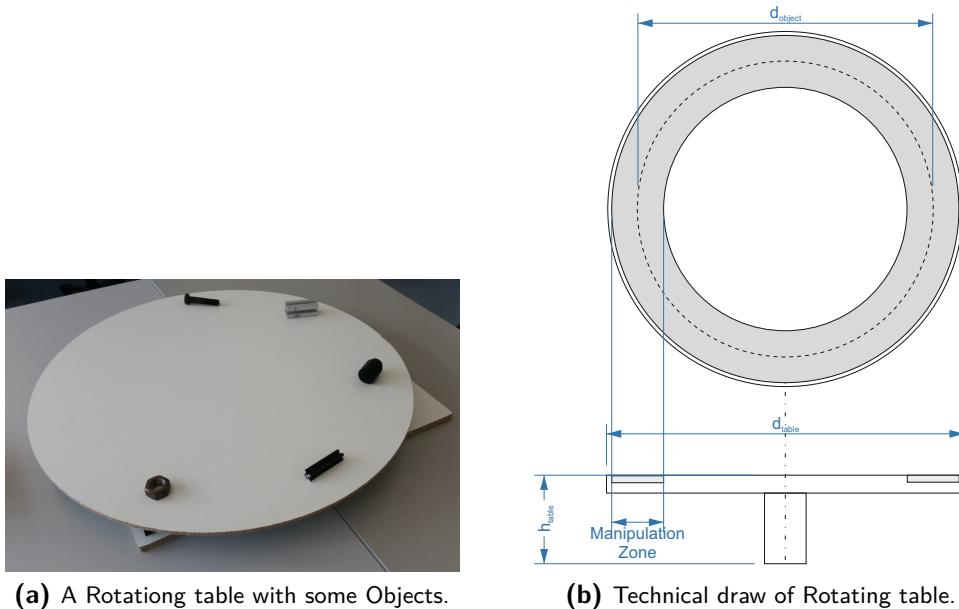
Exemplary Rotating table and generic technical drawing.
